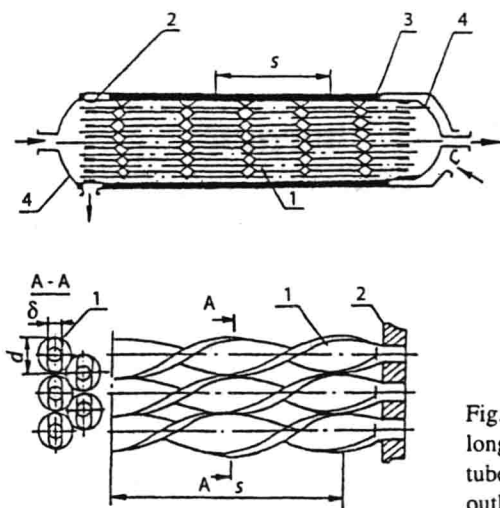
General view of a heat exchanger with a longitudinal flow past twisted tubes: 1 – twisted tubes; 2 – tube boards; 3 – shell; and 4 – inlet and outlet tube stubs.
